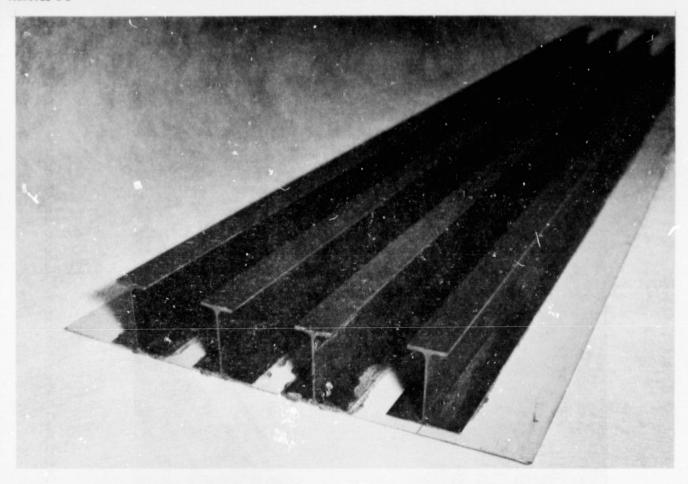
"I" Stringer Stiffened Skin Element in Vacuum Bag Bonding Fixture
